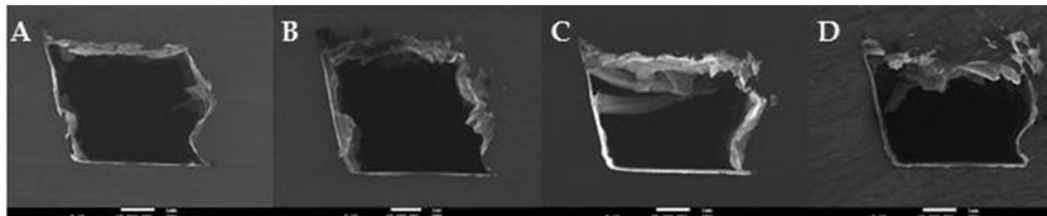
Cross section macrograph showing the channel geometry at different FSC processing parameters for the same FSC tool: a) 600 rpm, 80 mm/min.; b) 600 rpm, 150 mm/min.; c) 800 rpm, 80 mm/min. and d) 800 rpm, 150 mm/min.
